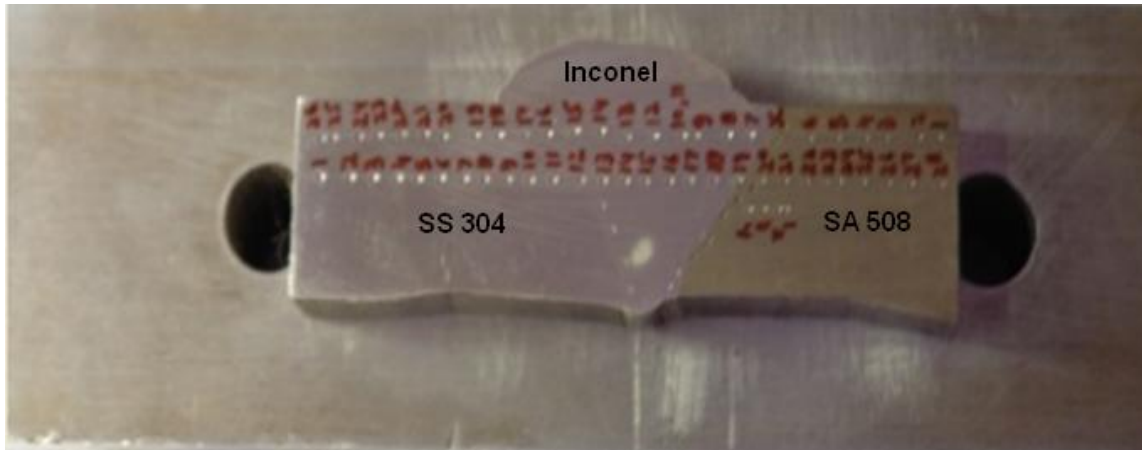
Specimen Bimetallic weld Joint of SS 304-LN and SA-508 Class 2
